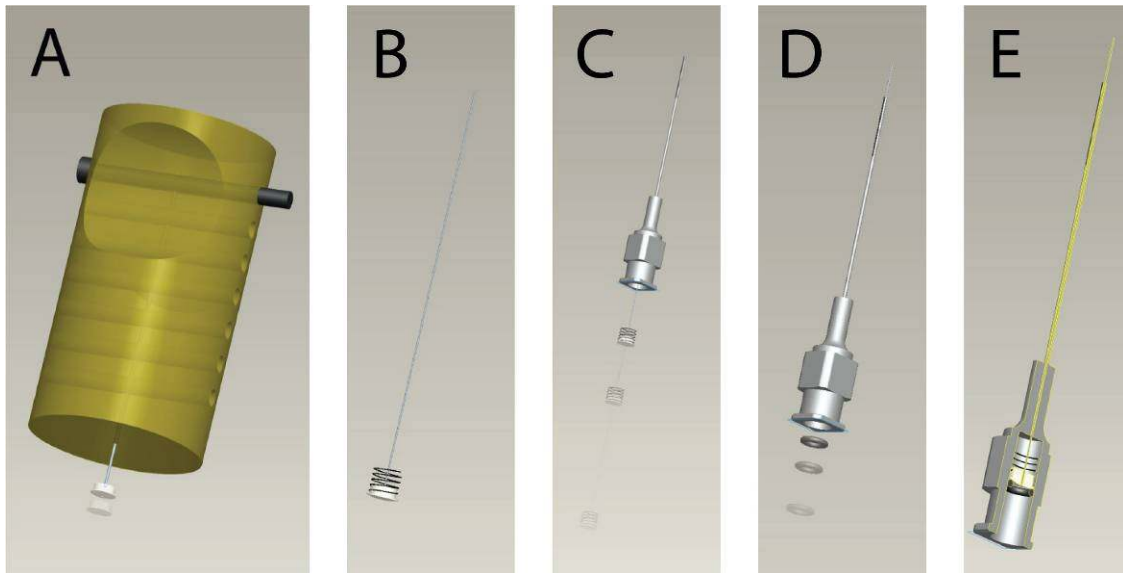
Cartoons showing the assembly process for the luer needle package. (A) A jig is used to facilitate the directed insertion of the drive cable into the slot of the button, which is adhered with epoxy. (B) A spring is slid over the button sleeve, and the assembled spring loaded button is inserted into the luer housing (C). (D, E) An o-ring is inserted to seat the spring-loaded button and act as a physical stop to ensure spring tension and to provide consistency in the button location.
